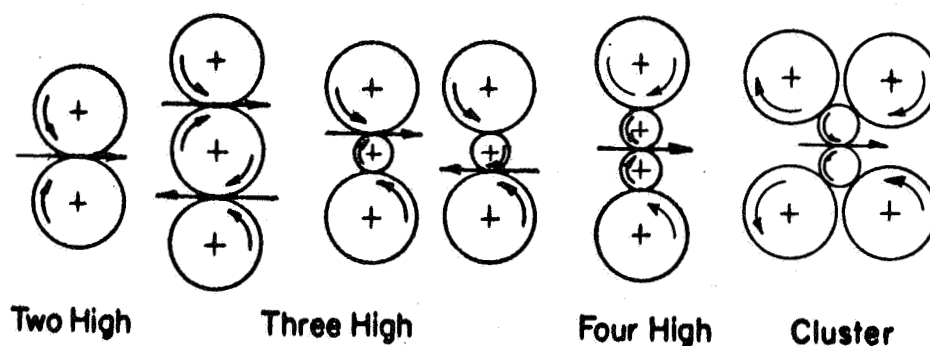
TYPICAL ROLLING-MILL DESIGNS
